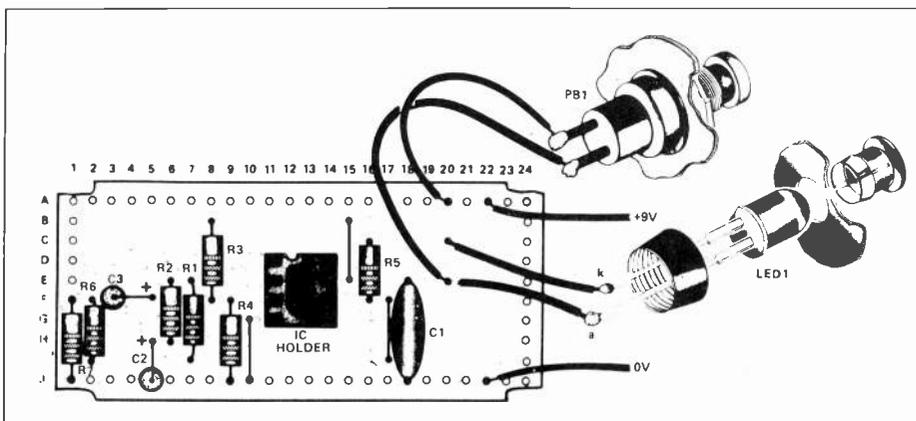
Board layout and wiring connections of the OP Amp Checker.
